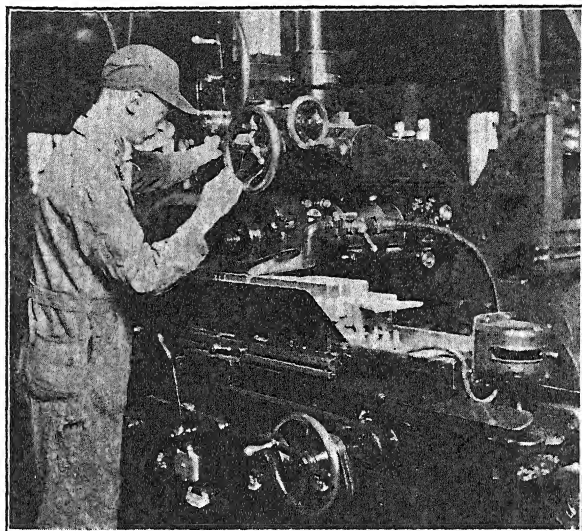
Straight-Wheel Surface Grinding on a Norton Co. 6- by 10- by 36-In. Type "G" Surface Grinder in Which the Work Is Mounted on an O. S. Walker Co. Electric Chuck.
